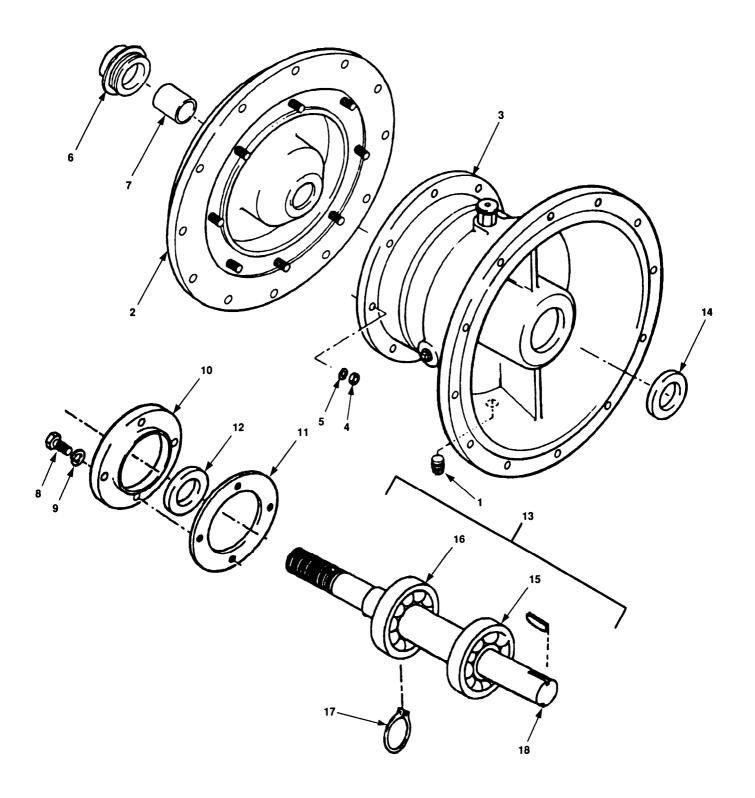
Sleeve and Rotating Assembly Maintenance.
